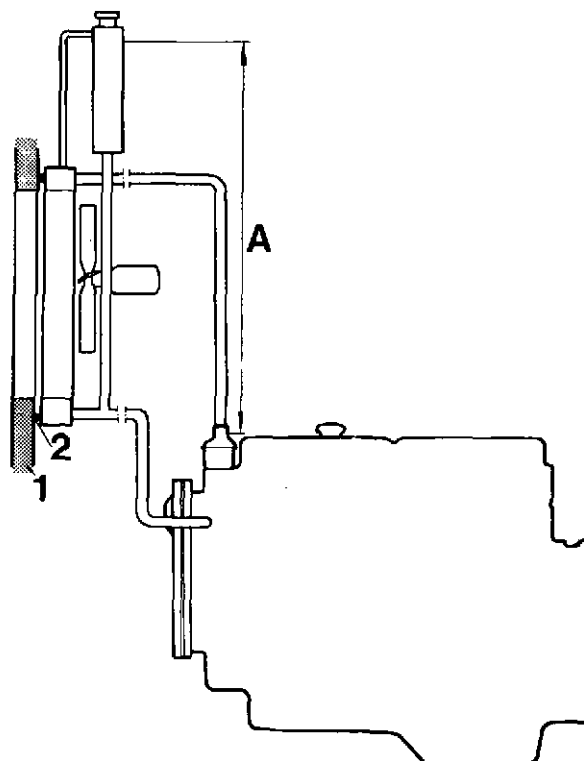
Cooling system with radiator placed at an opening in an outer wall
